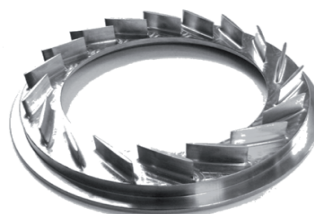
Experimental 1.4006 stainless steel wheel with blades
